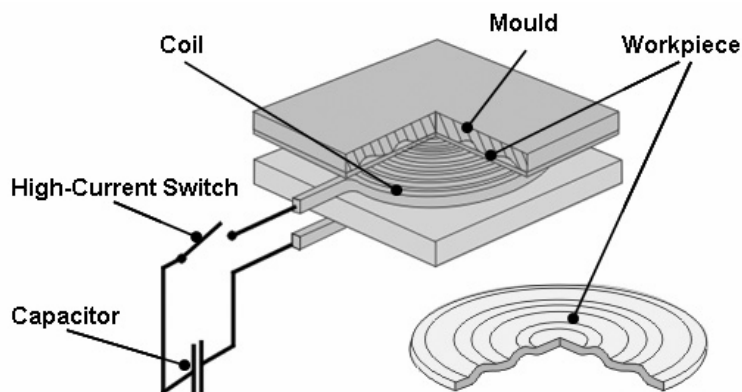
Tool and workpiece by pulsed magnetic flat forming
